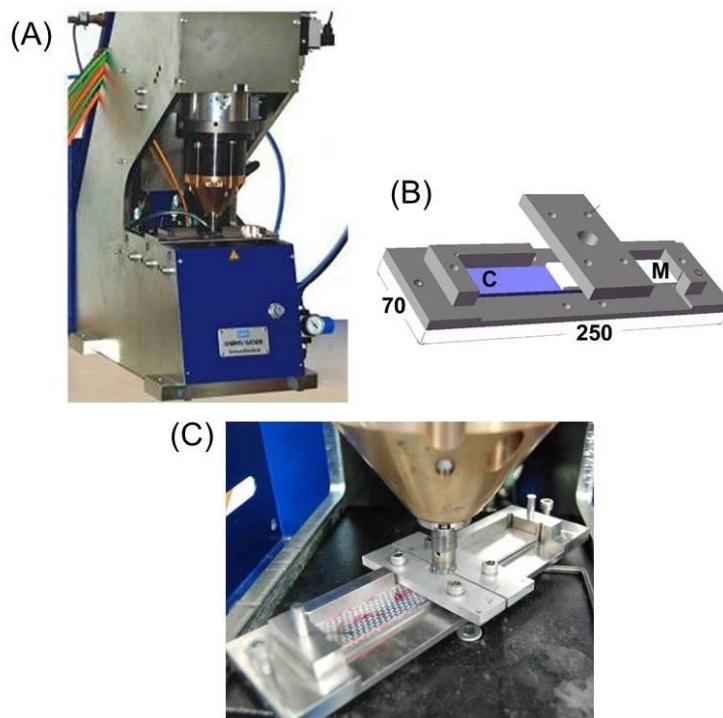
(A) RPS 100 equipment, (B) schematic illustration of the sample holder with the positions of the composite part - C and metal part – M, the interlayer is in between, and (C) joining parts and welding head of the RPS100 equipment. (Adapted from [70]).
